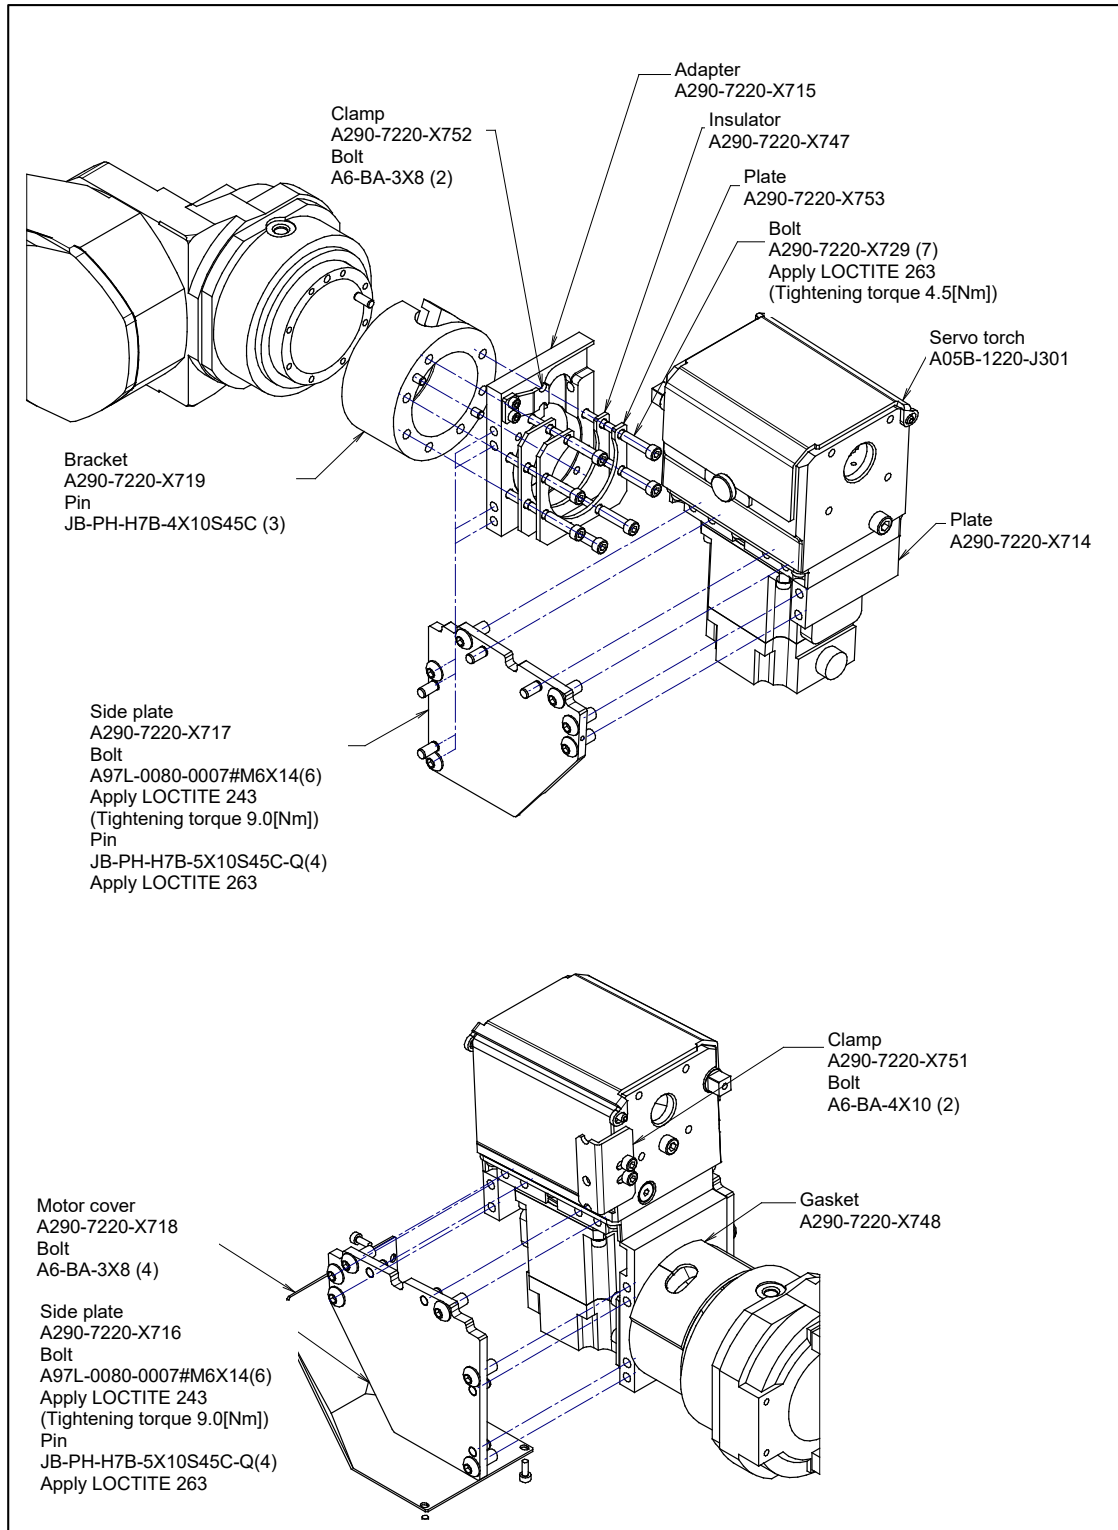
(a) Servo torch for aluminum installation (Bracket assembly spec. A05B-1220-J321)
